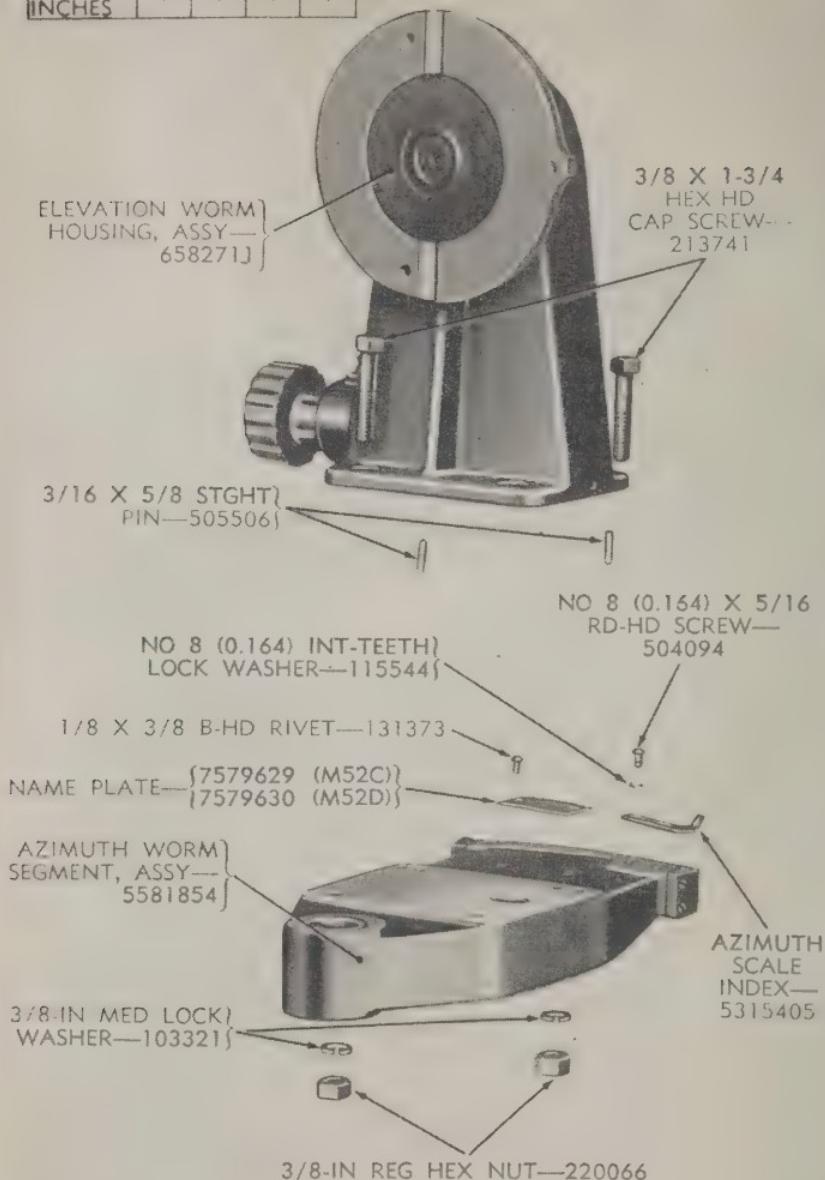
Telescope mounts M52C and M52D—removal of the elevation worm housing assembly and azimuth worm segment assembly—exploded view.
